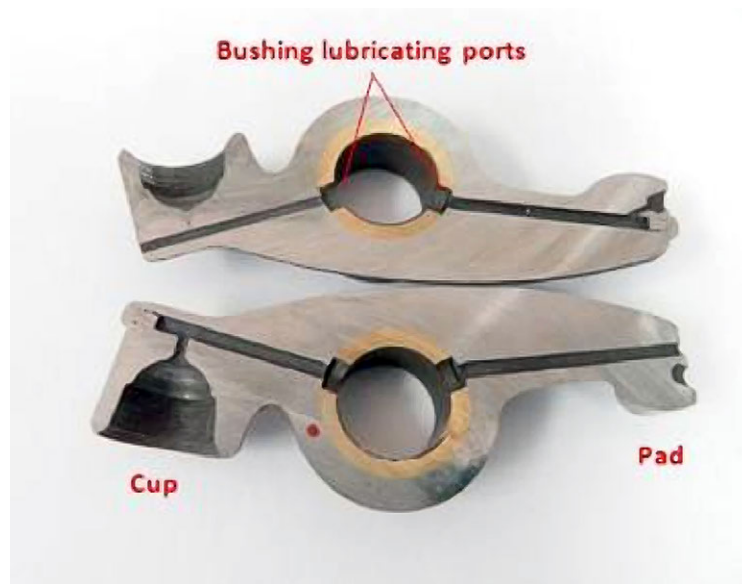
Cut-away view of a rocker arm showing the lubrication system
